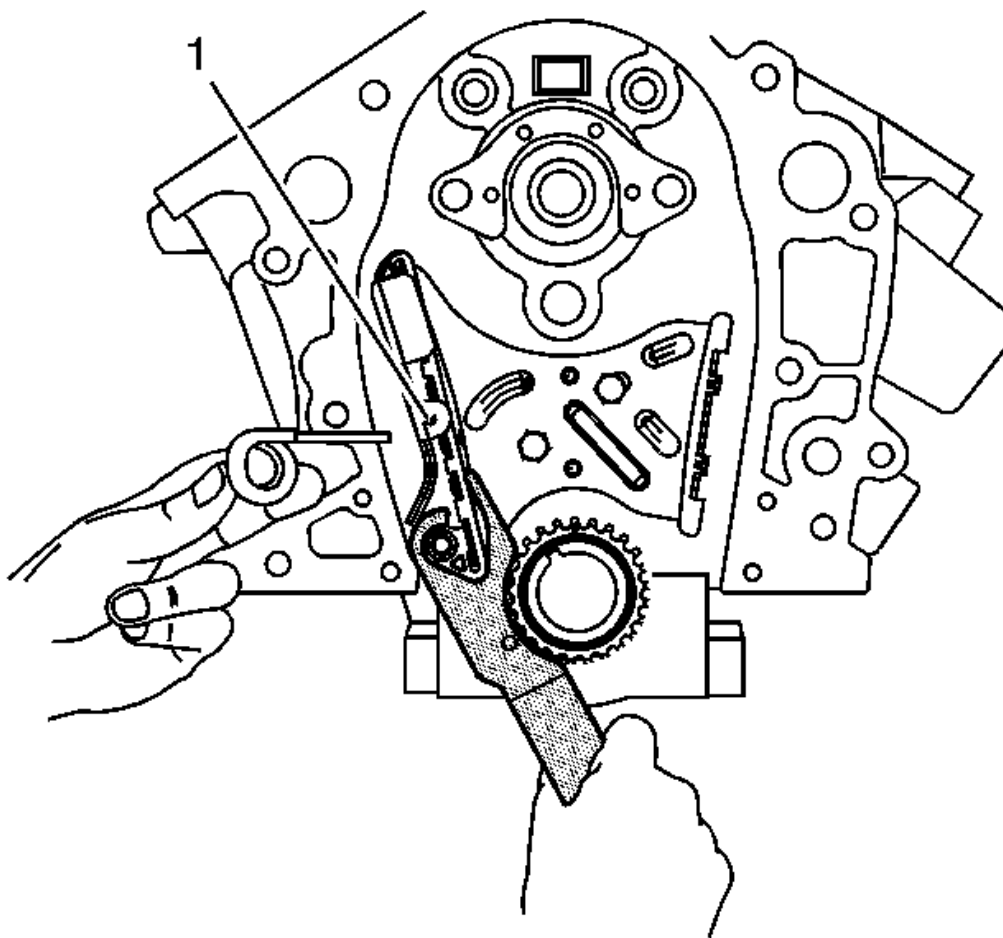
Collapsing Tensioner & Placing Retaining Pin
